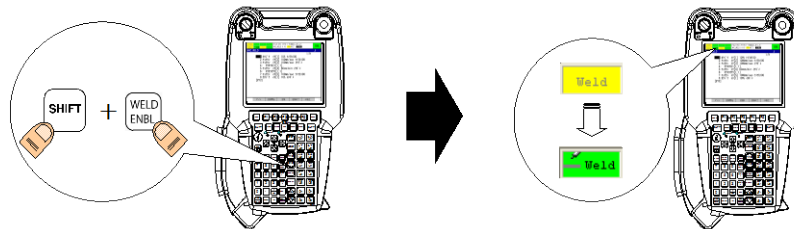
(a) Switch to Weld Enabled
